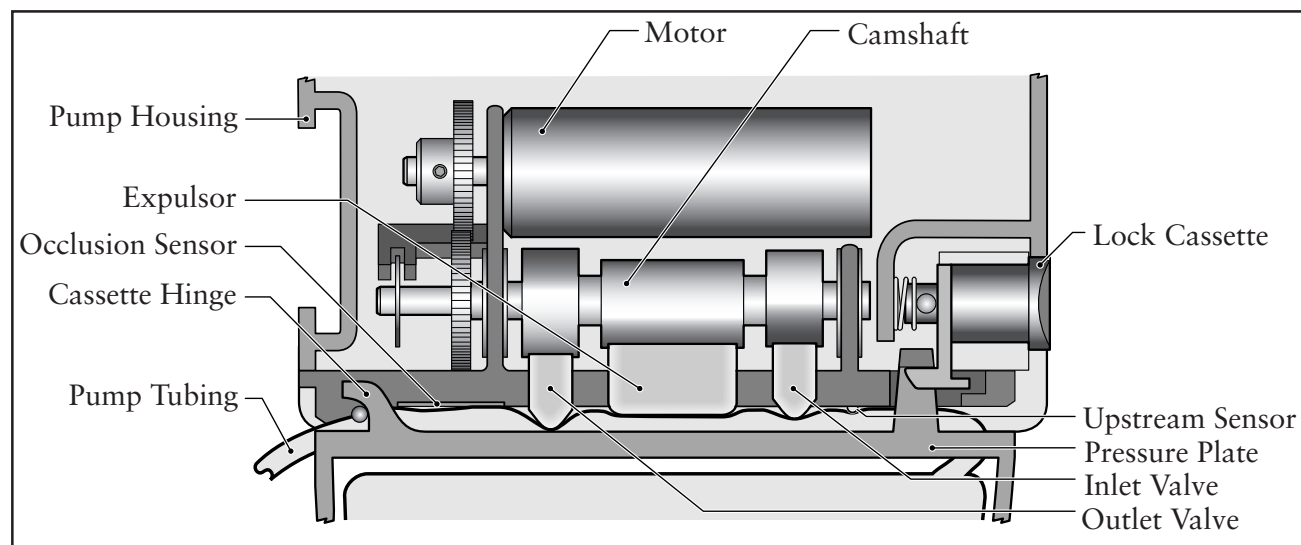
A simulated pumping mechanism in a CADD-Legacy™ pump.
